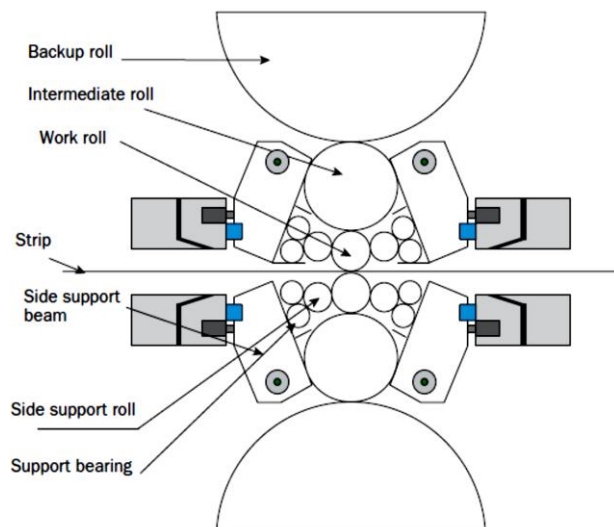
Typical schematic interior diagram of cluster mill (Sendzimir mill) for cold rolling stainless steel [24].
